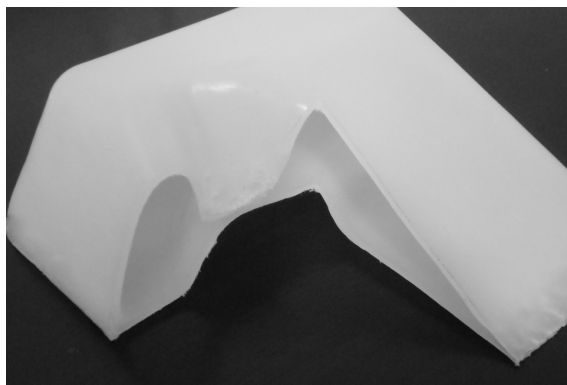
Rotational moulding parts cut for thickness evaluation
